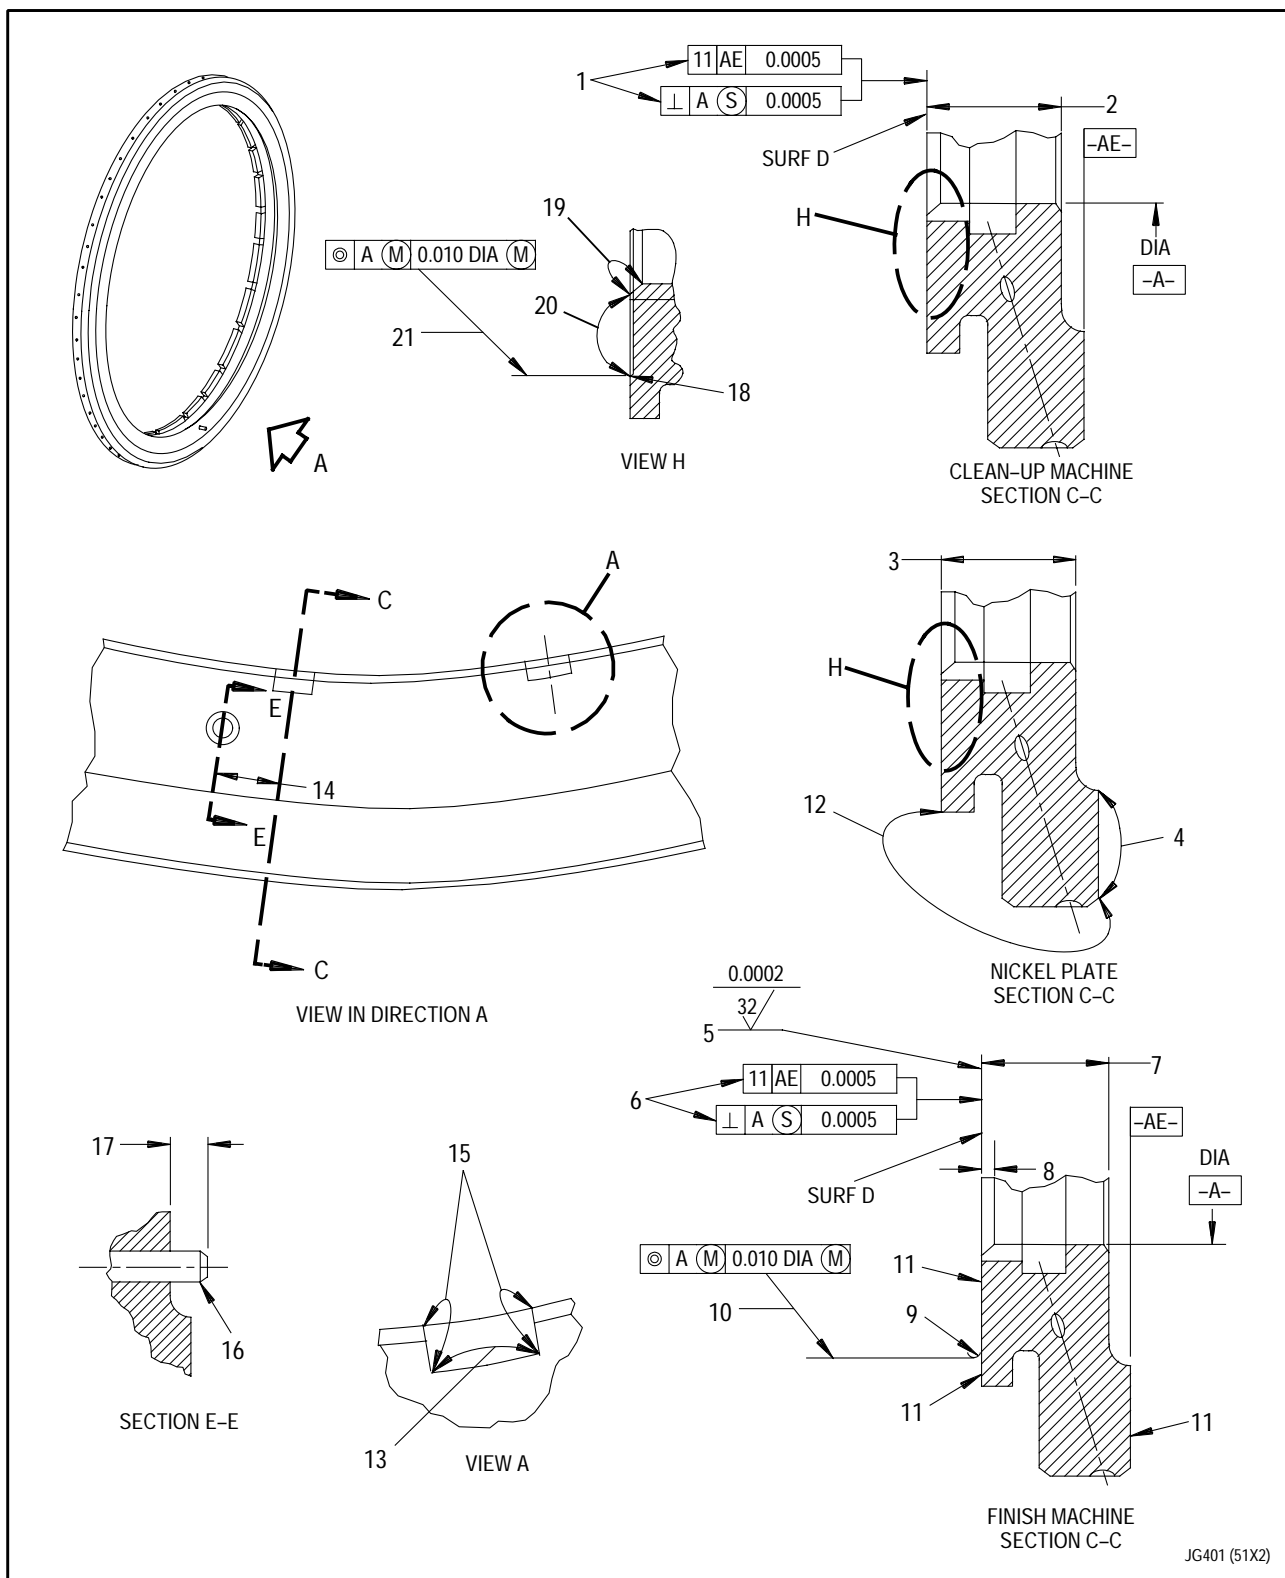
No. 4 Bearing Front Seal Seat Assembly (PN 4032669) - Nickel Plate Rear Inner Face Repair
